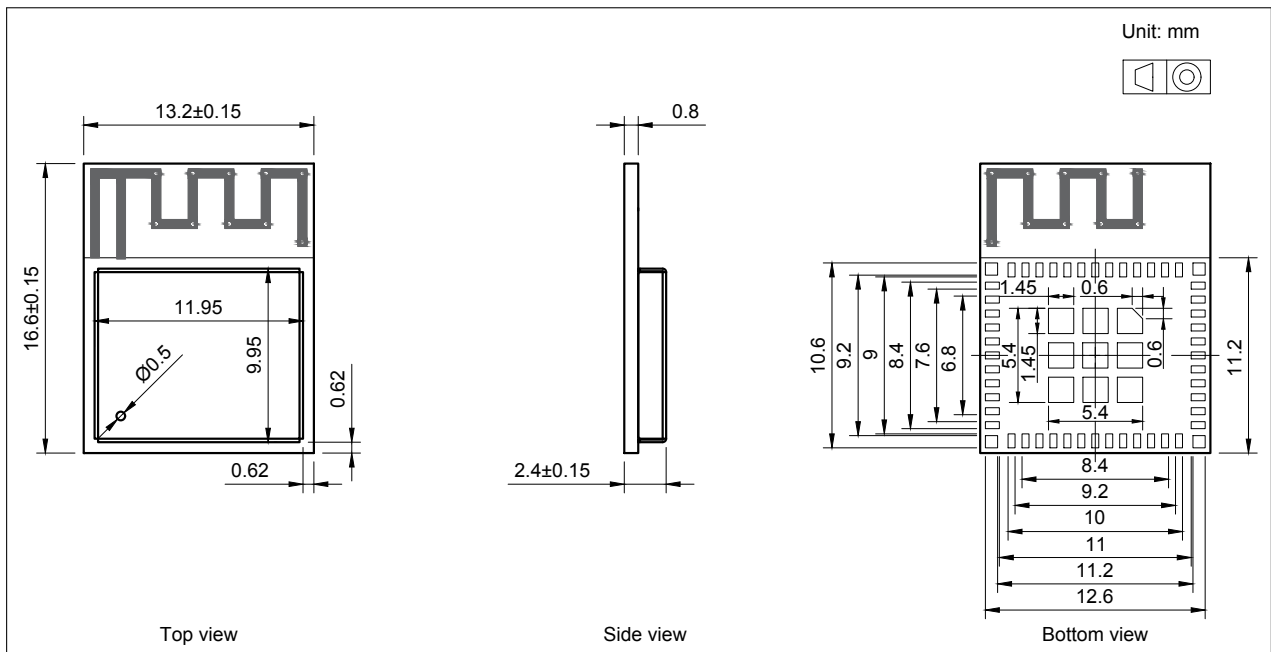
ESP32-PICO-MINI-02 Physical Dimensions
